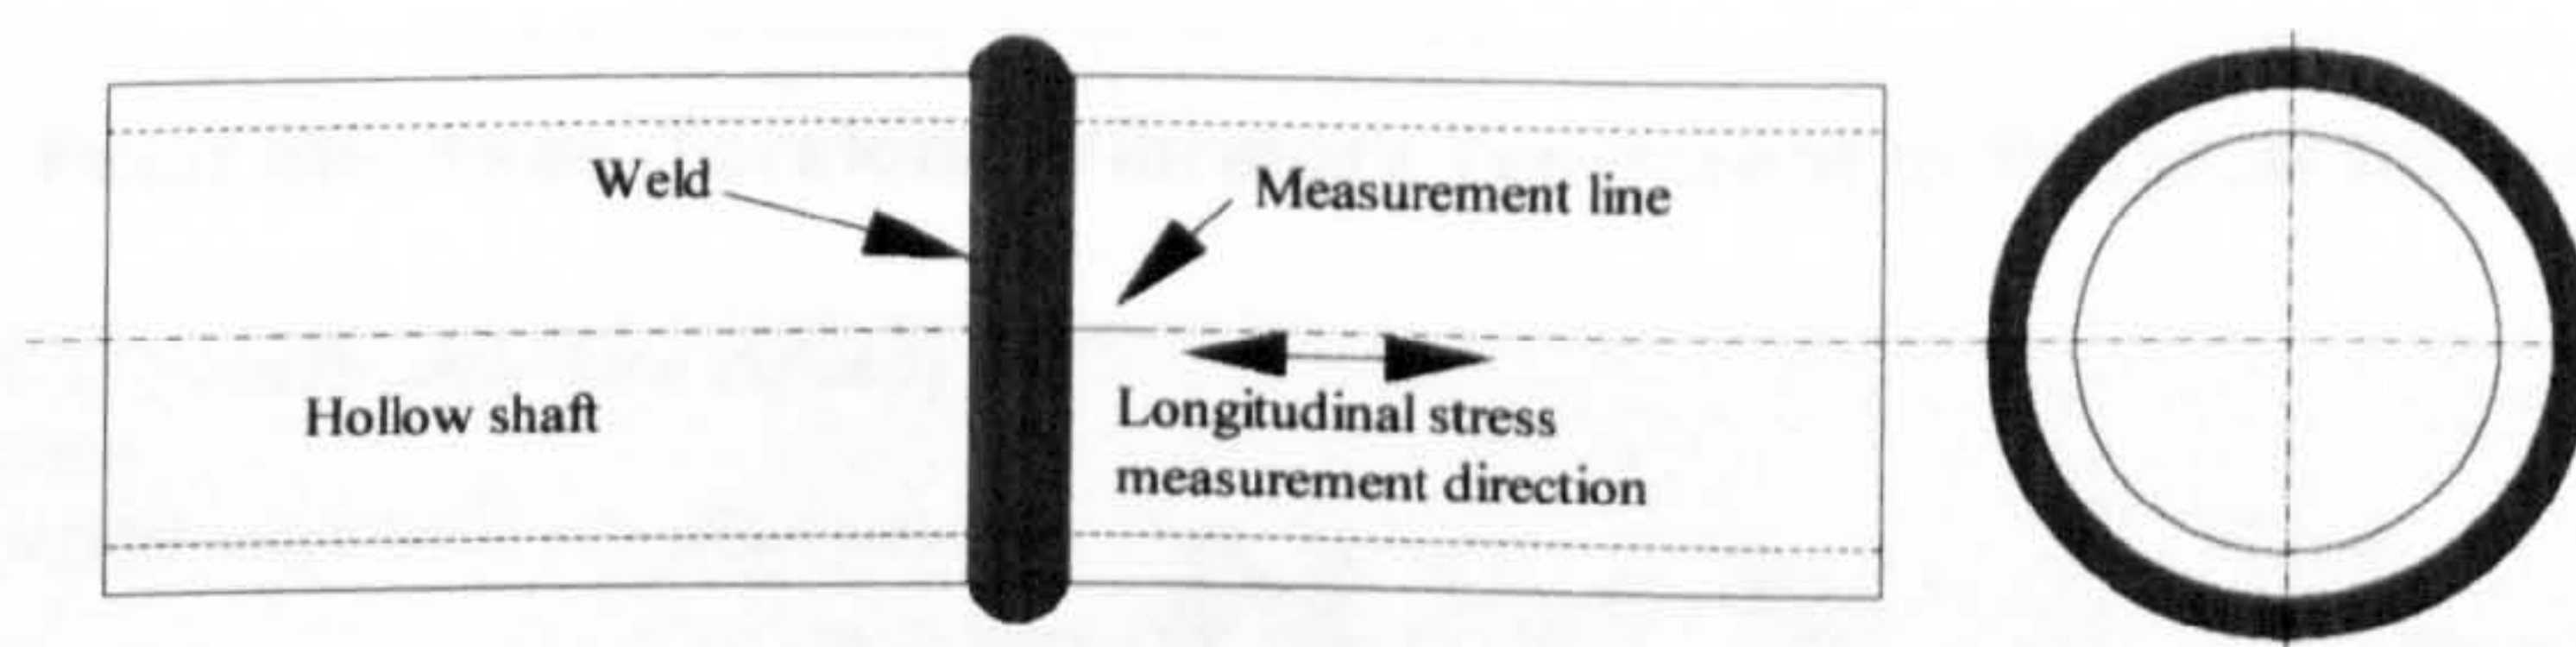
Weld and position of measurement line on shaft 1/6
